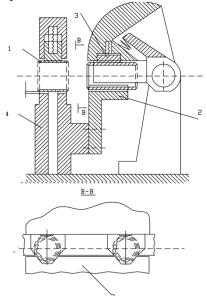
Mounting of a bush and a piece of type roll: the case in wich the prism of fixation is located in the lower.
